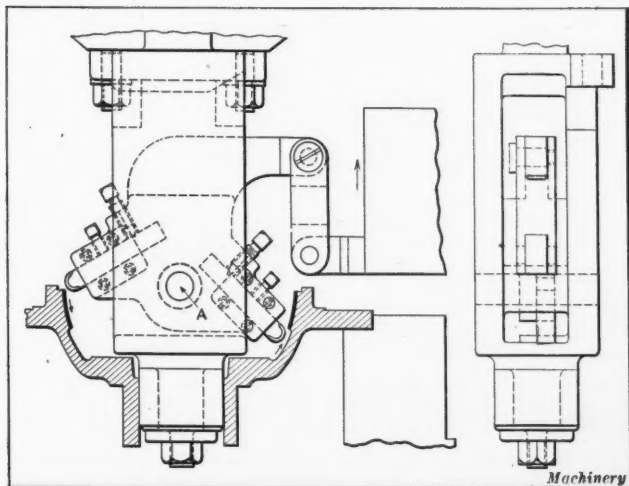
Spherical Turning Tool-head used in machining Interior Surfaces of Gear-case shown in Fig. 9
